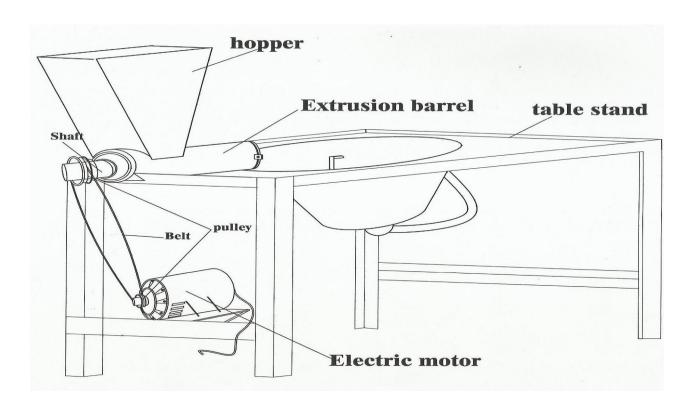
Schematic Drawing of the Assembled Pelletizing Machine
